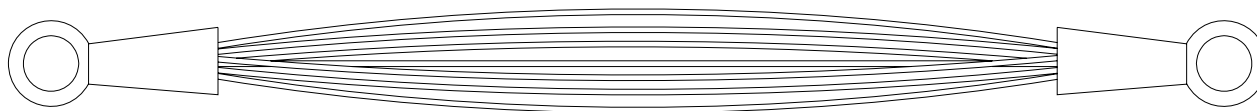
Chassis To Yoke Ground Cable Assembly
